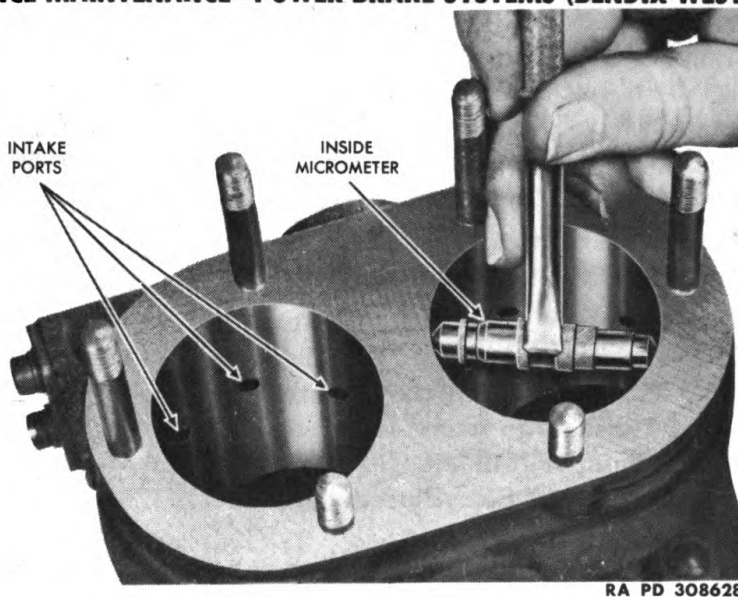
Measuring Cylinder Bore Diameters, Using Tool 41-C-304
